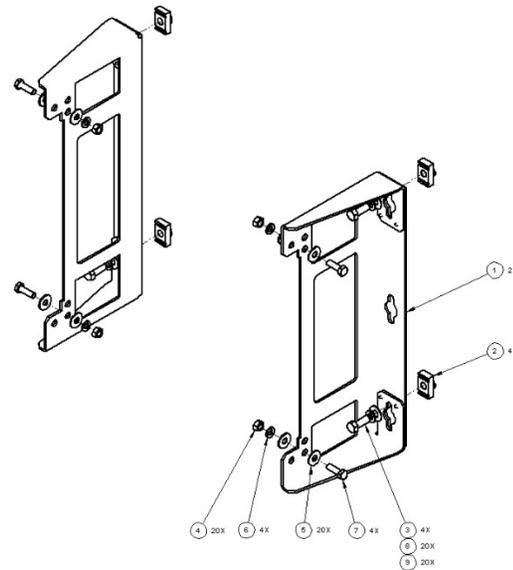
Vertical Frame Uni-Strut Mount HPOD Mounting Bracket Kit (KT-0021261)
